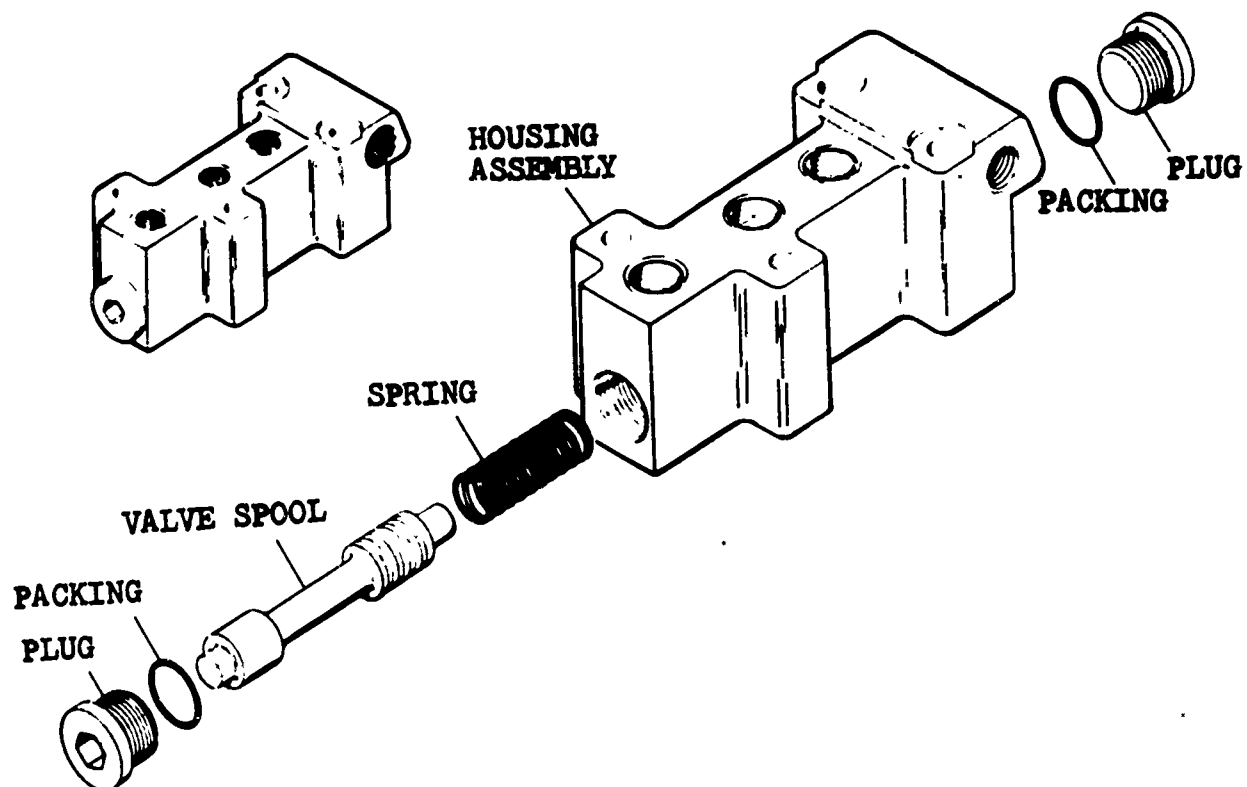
First and Second Range Brake Relay Valve Assembly (exploded view)
